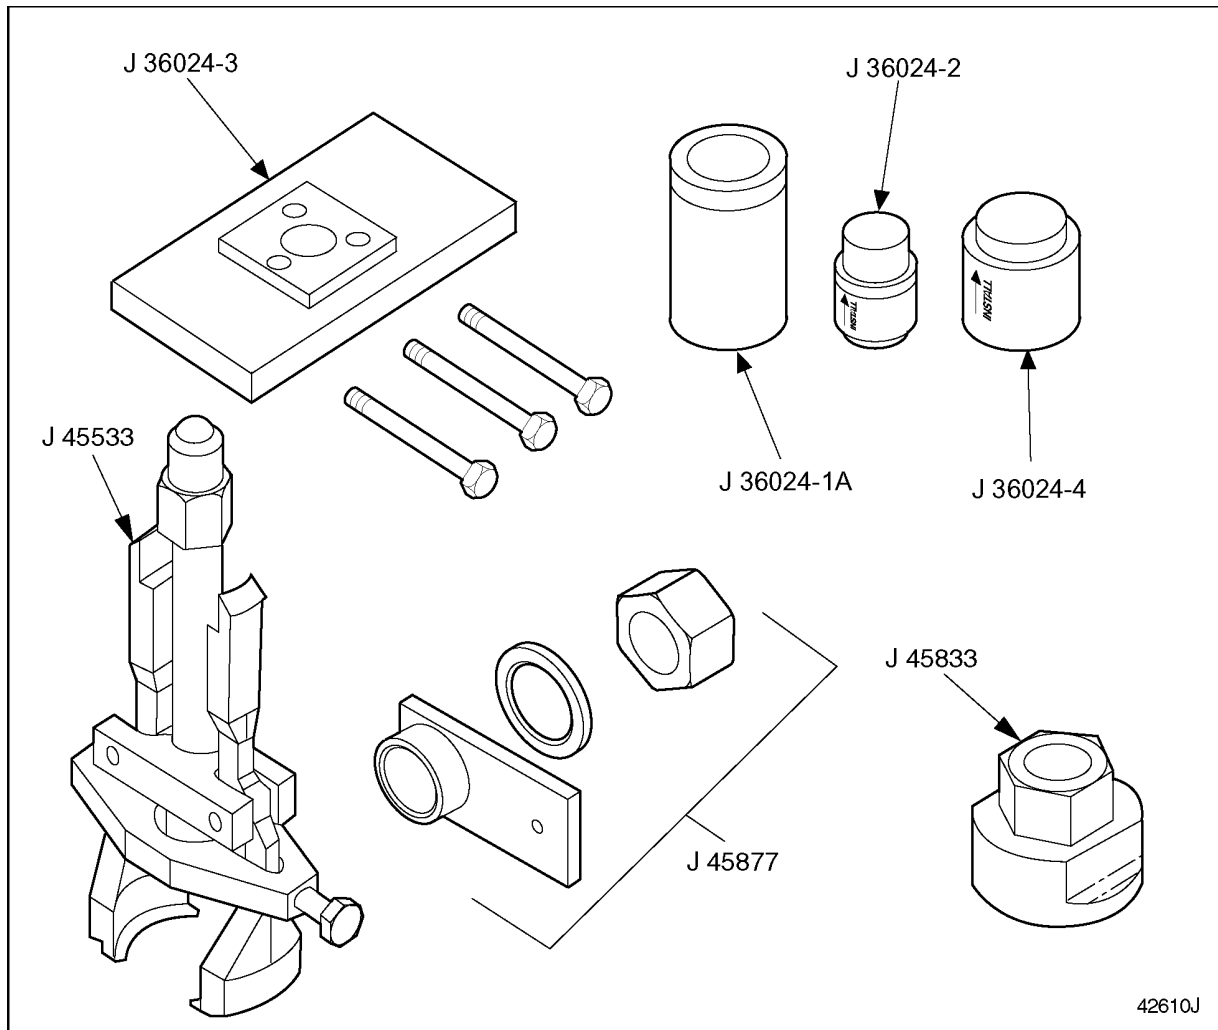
Accessory Drive Service Tool Set J 36024-D
